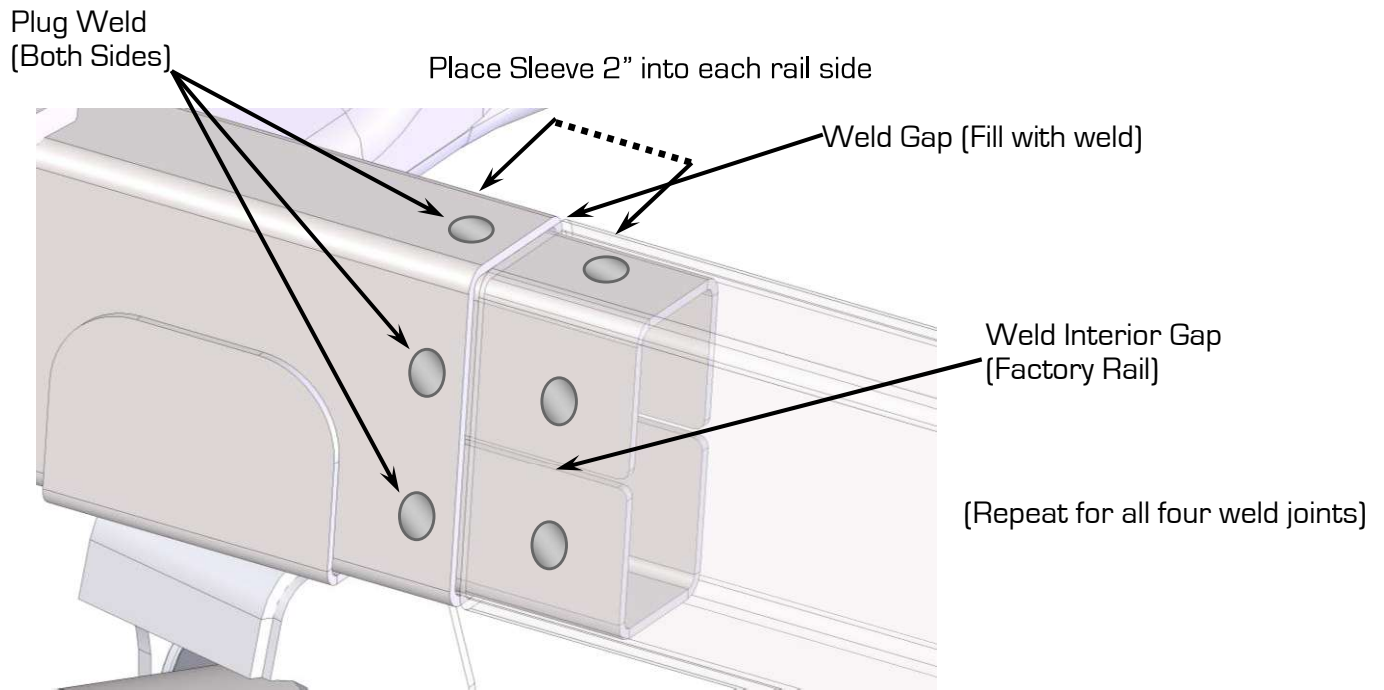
Frame Rail Doubler Sleeve Final Installation
